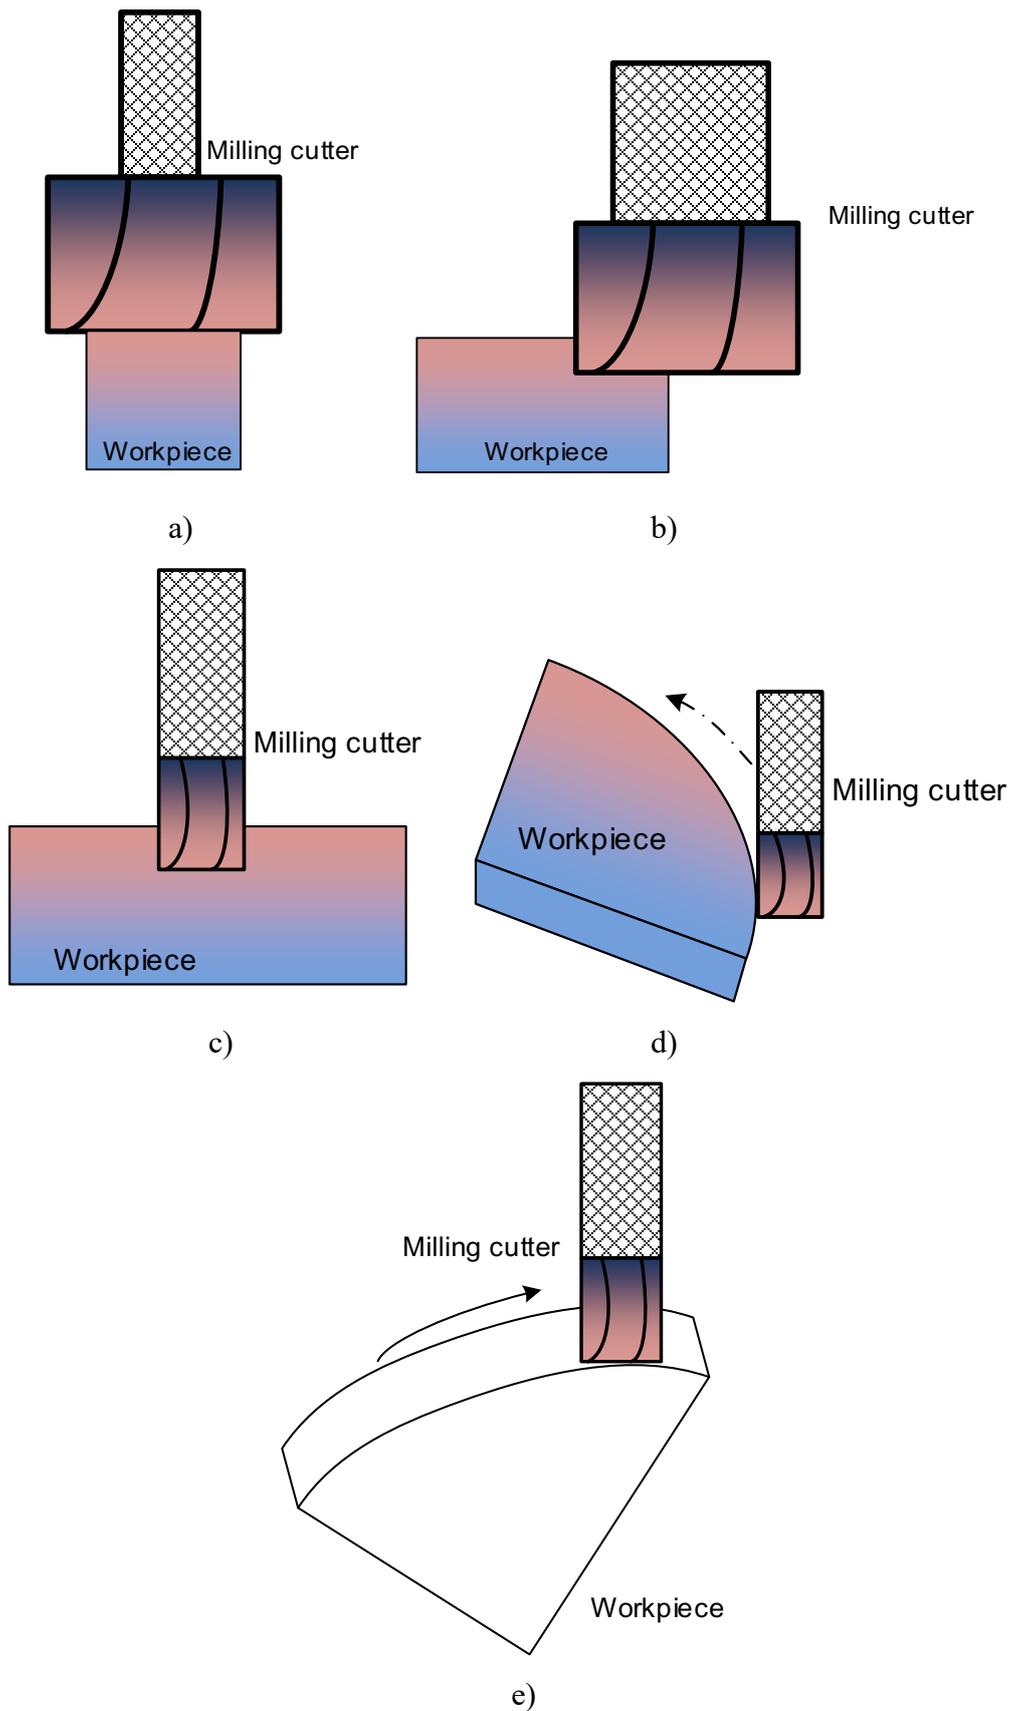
Schematic diagram showing face milling operations a) flat milling, b) side milling, c) slot milling and d, e) surface profiling / contour milling.
